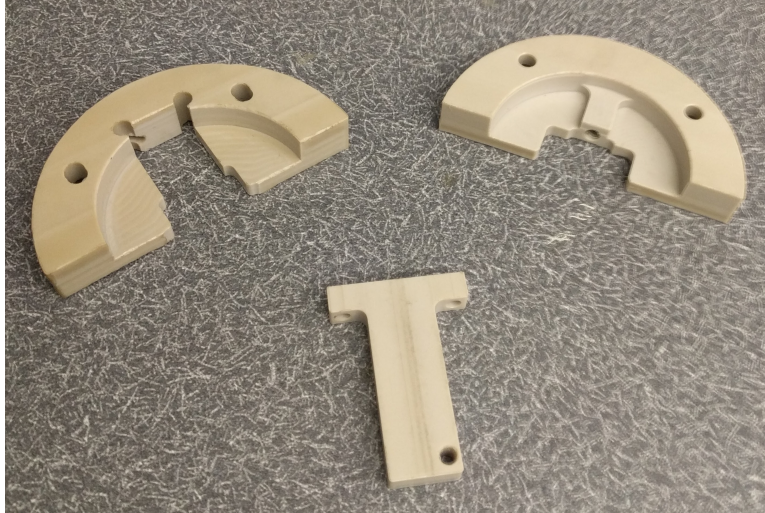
The finished guide pieces for use in the testing accumulator.
